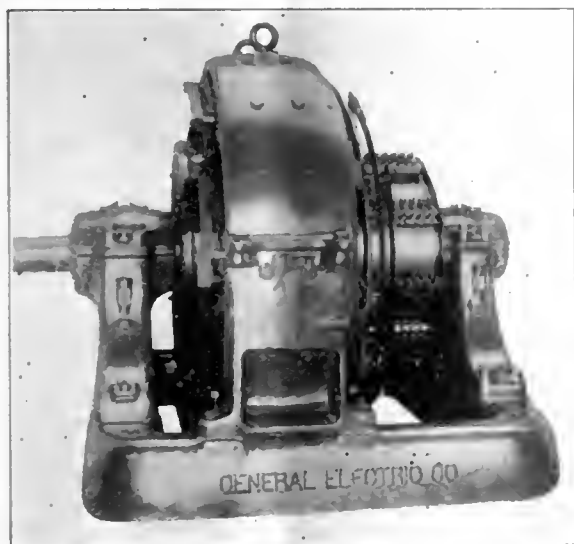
PORTABLE ARC WELDING EQUIPMENT.
